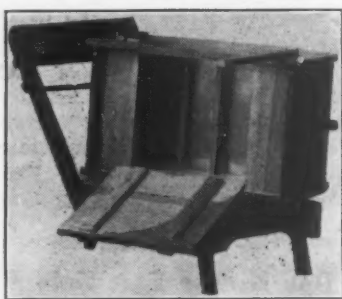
Partial View of Interior of Washing Machine Suds Box.
